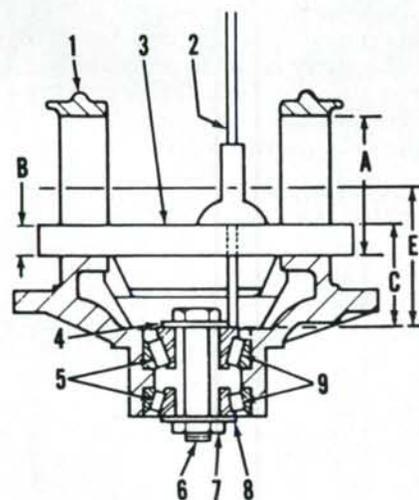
Diagram showing method of securing pinion shaft bearings in carrier housing to allow depth gage measurement to be taken when setting pinion bearing preload. Refer to text.
